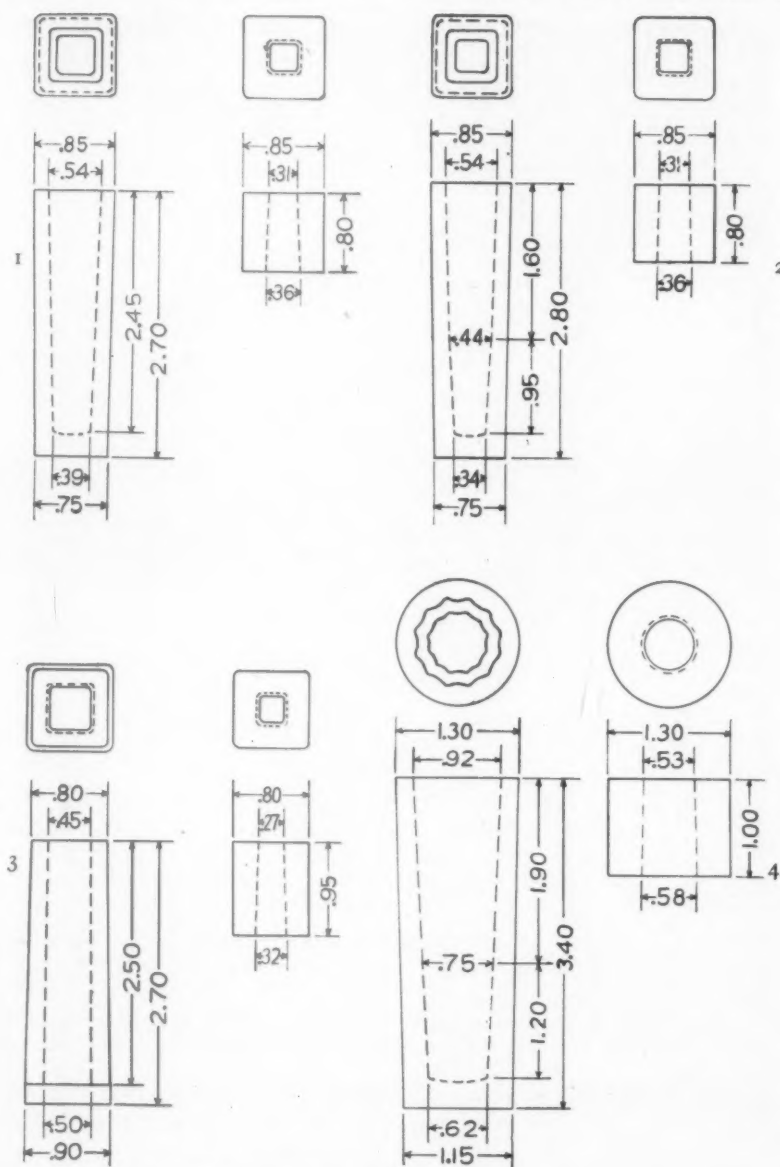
INGOT MOLDS. ALL DIMENSIONS IN INCHES.
